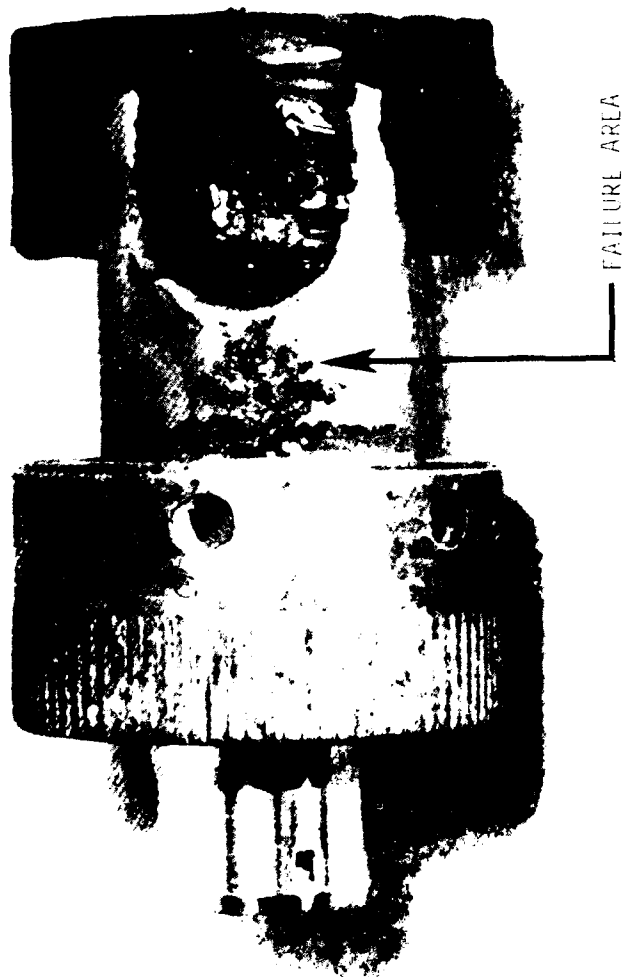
TYPICAL BOND FAILURE AREA IN RIGHT-ANGLE PLUG DESIGN WITH SLOTTED PLUG SCHEMATIC
